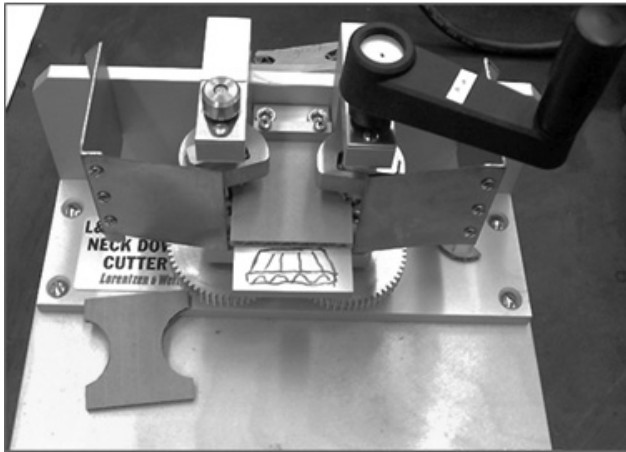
Fixture with rotating blades for cutting neckdown board pieces for the TAPPI T 838 method ECT
